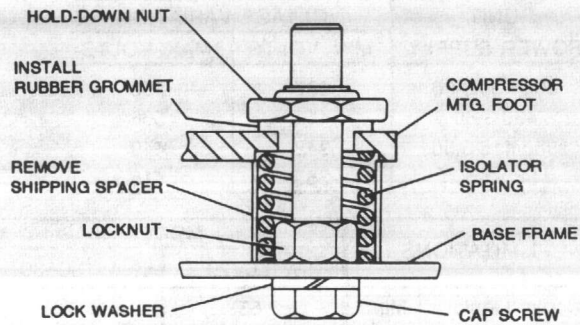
COMPRESSOR HOLD-DOWN NUTS
